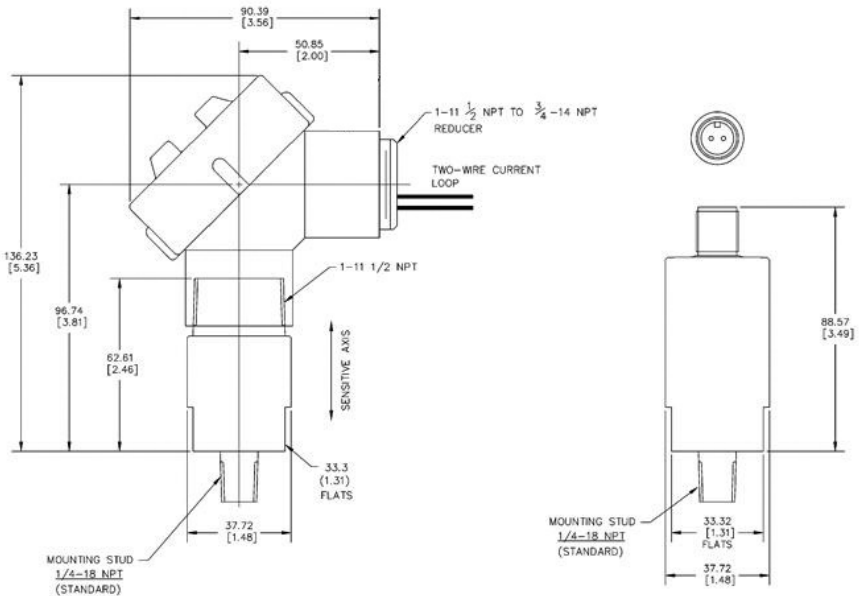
Outline dimensions of the ST5484E (all versions except MIL-Style Connector). Dimensions in mm [inches]. Optional* 8200-001 conduit elbow shown installed.
